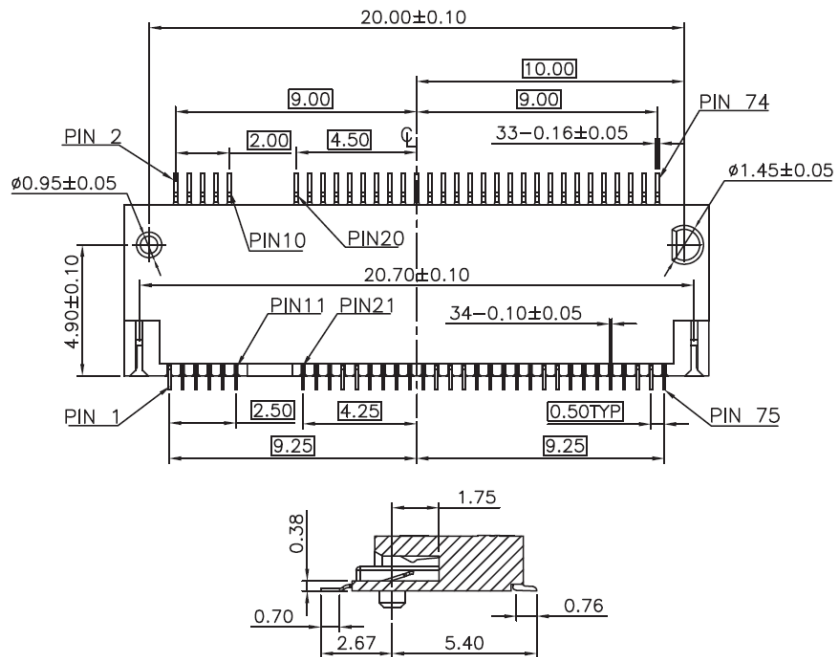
M.2 dimensions of structure for stack-up top-mount single-sided module
